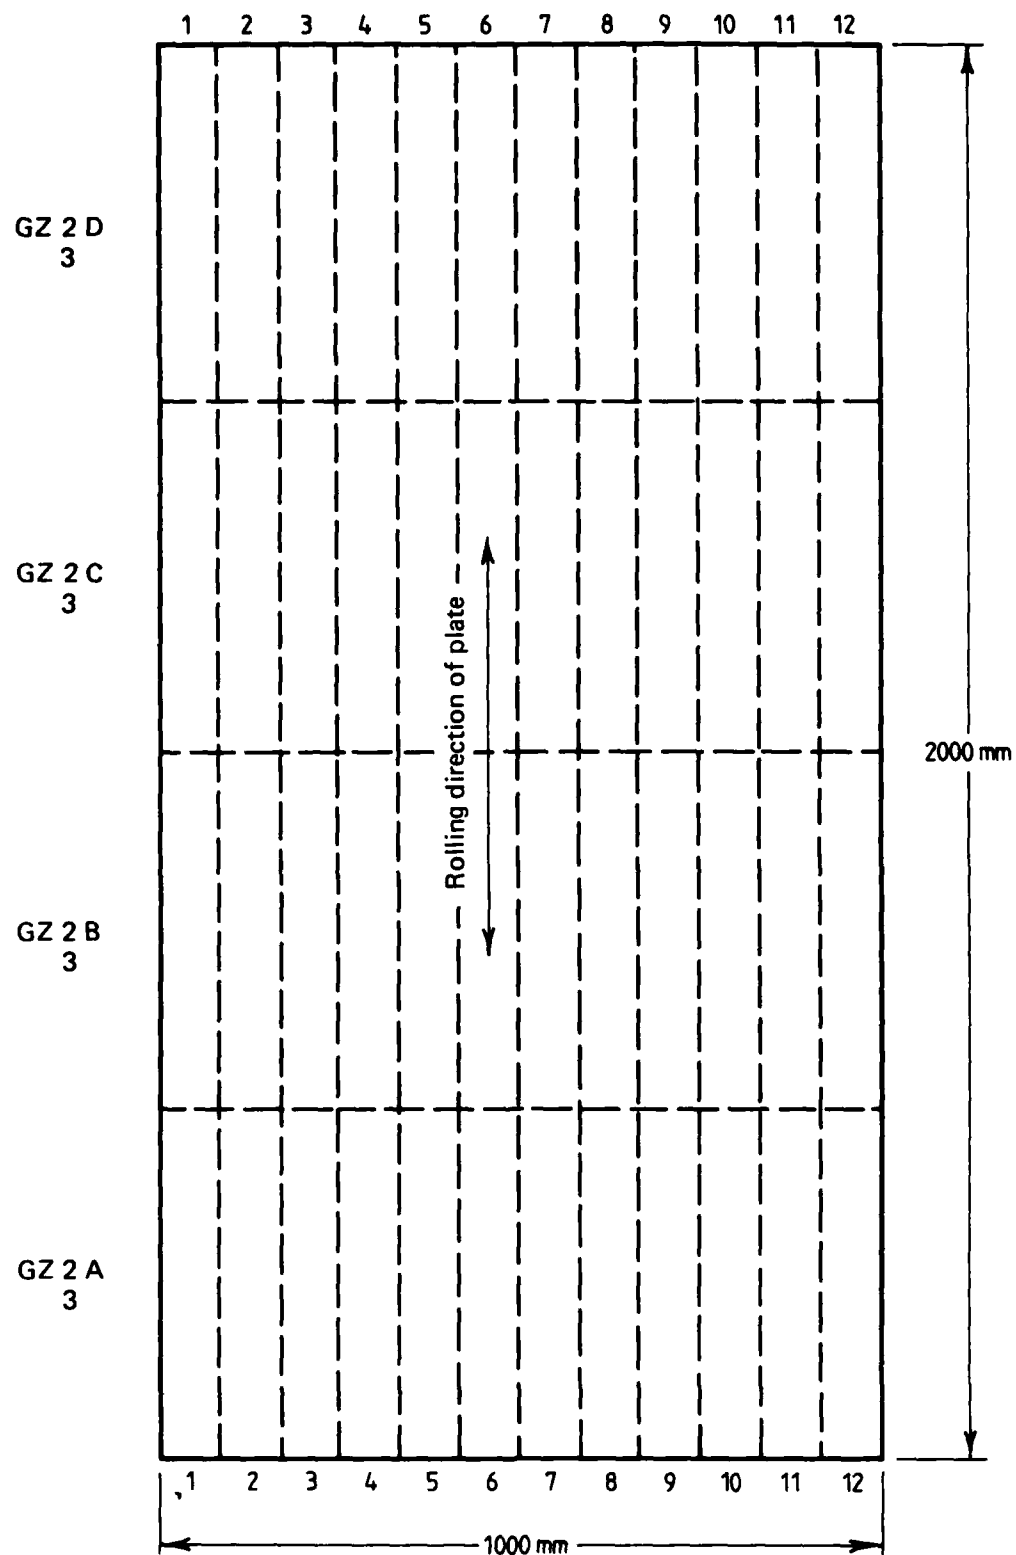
FATIGUE SPECIMEN POSITIONS IN A7-U4SG PLATES
